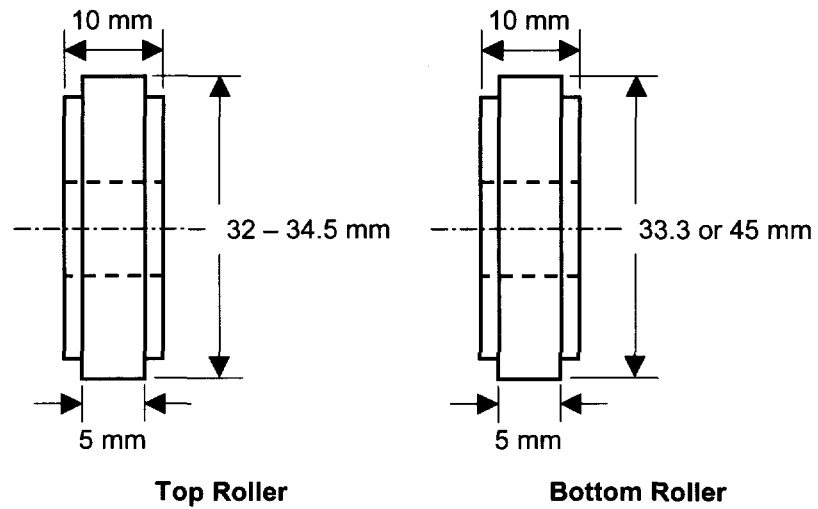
Roller top hat configuration and dimensions for top and bottom rollers.
